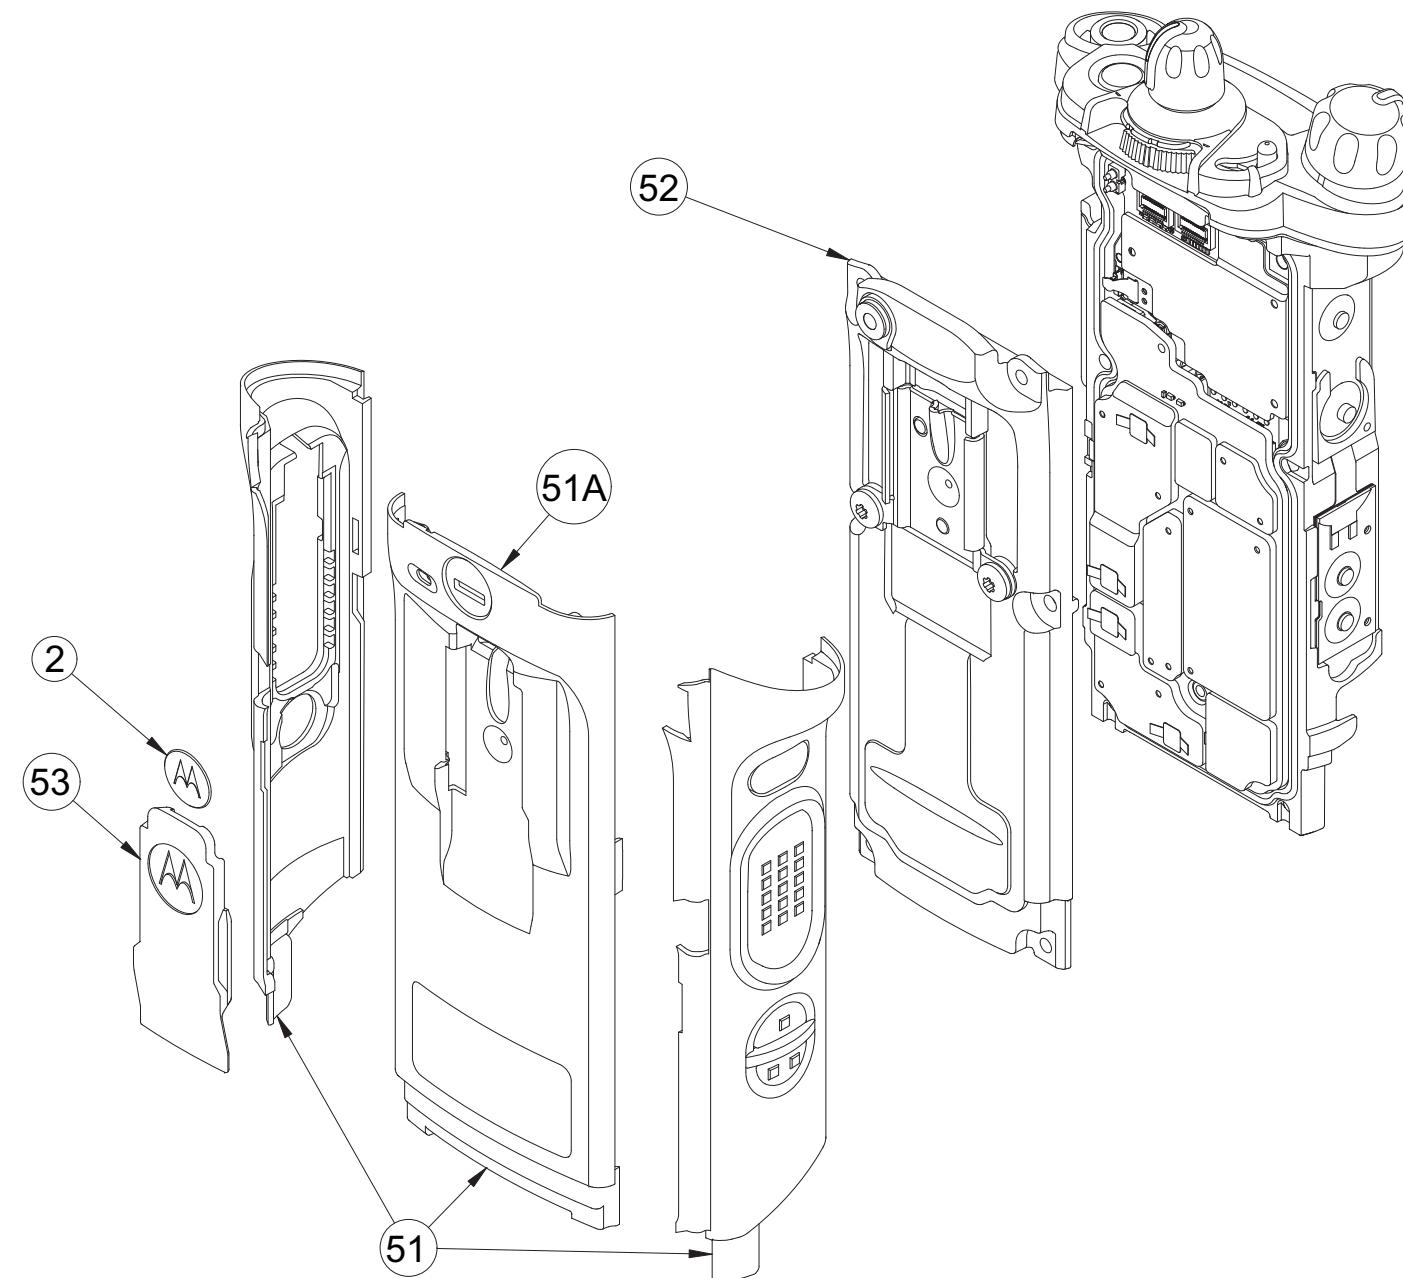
APX 5000/ APX 6000/ APX 6000Li Top Display Exploded View
